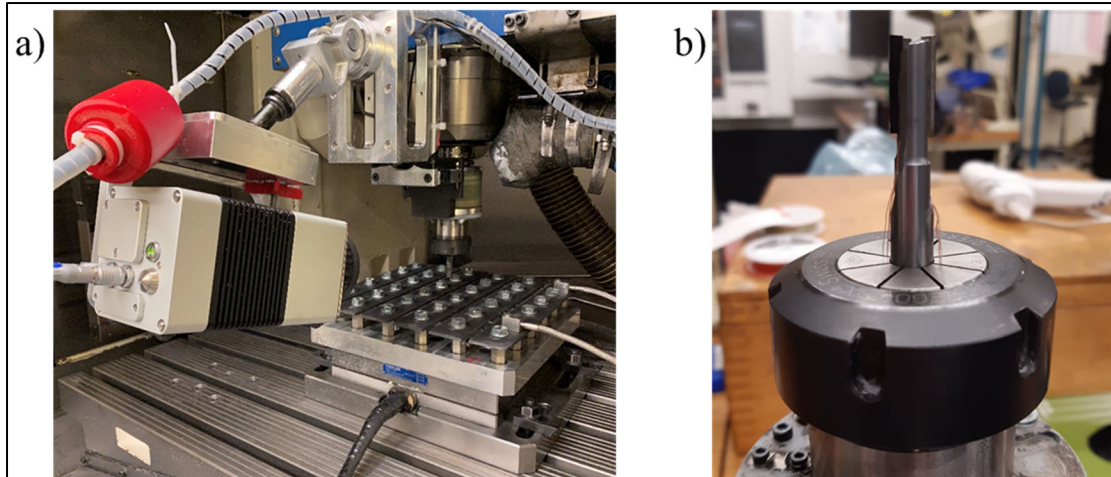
a) All the equipment of measurement in the CNC, b) Equipped PCD tool in tool holder
